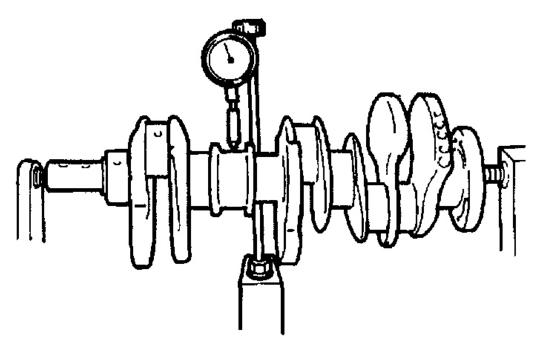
Measuring Crankshaft Runout Courtesy of SUZUKI OF AMERICA CORP.
